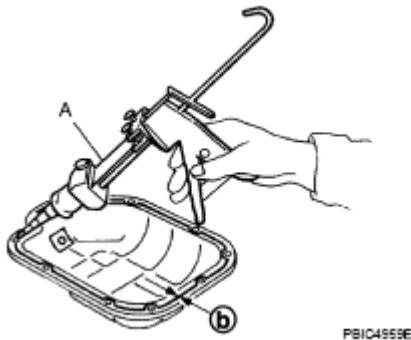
Applying Bead Of Liquid Gasket With Tube Presser
